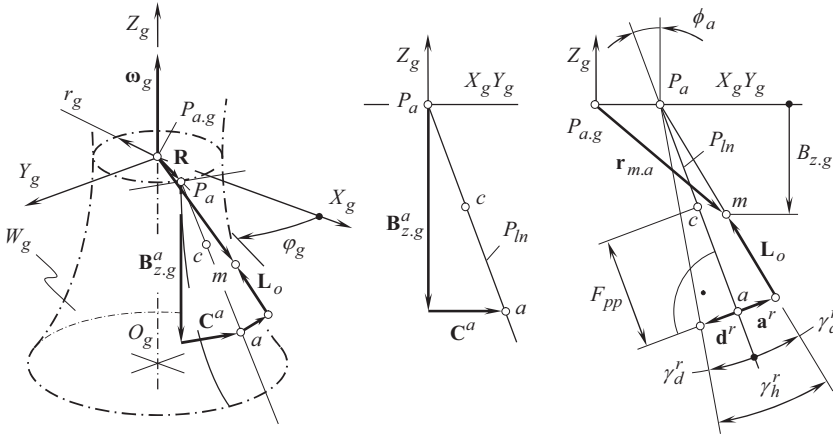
Generation of the outer surface of a gear for crossed-axes gearing.
